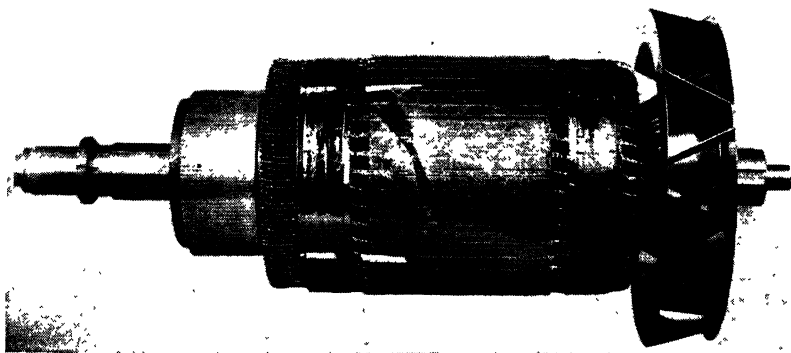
Completed Revolving Armature with Fabricated Steel Fan for D-C Motor or Generator.
